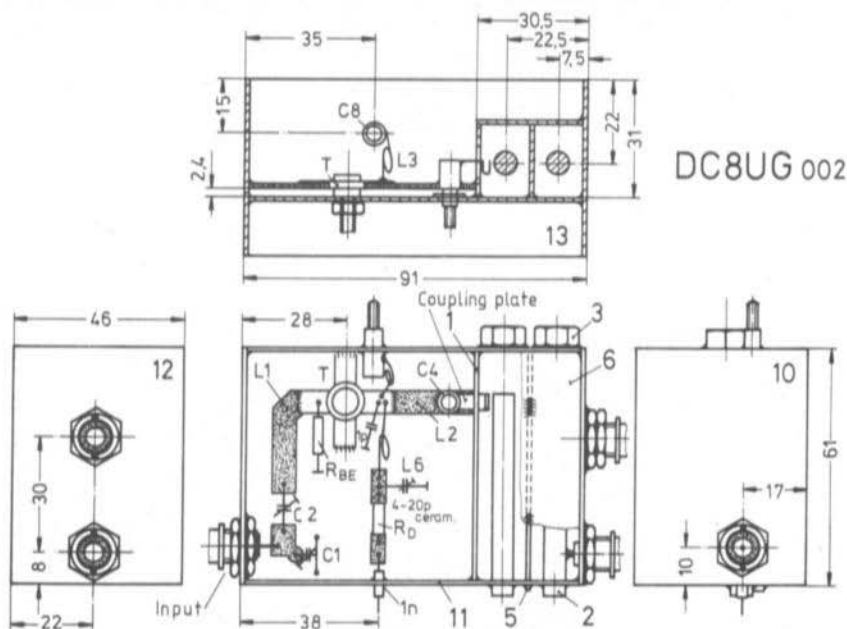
Layout of module DC 8 UG 002 with the most important dimensions
